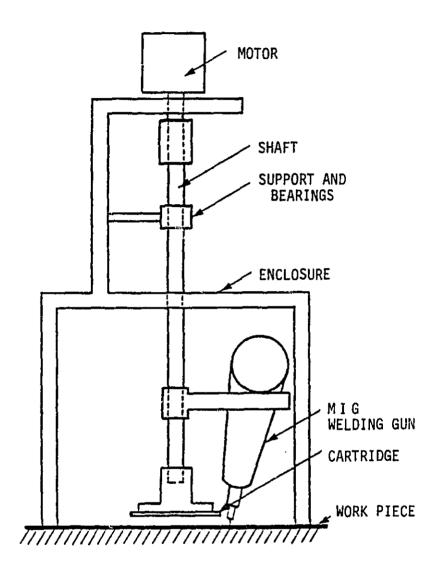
Sketch of an automatic welding system developed by Gustin capable of joining a circular patch to a flat plate
